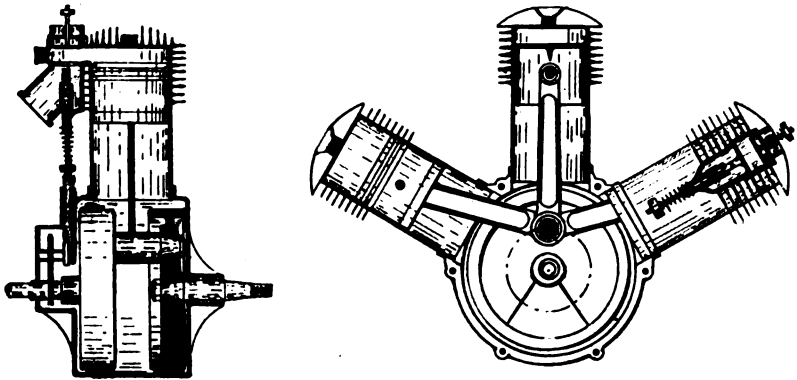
“Anzani” Engine. Type Blériot XI.
